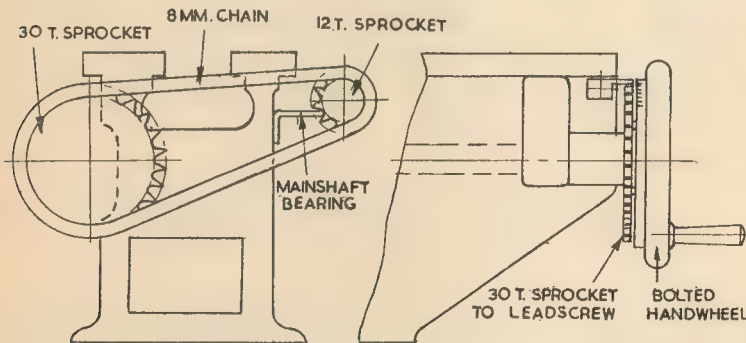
Tailstock end of lathe, showing chain drive from leadscrew to main shaft
